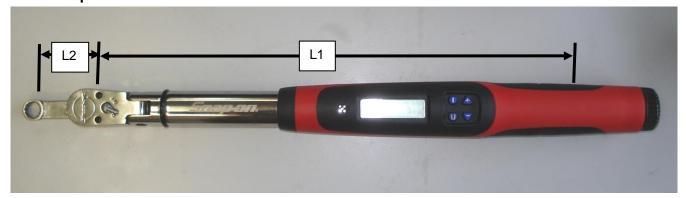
Torque Wrench & Crowsfoot Adaptor Setting 1
